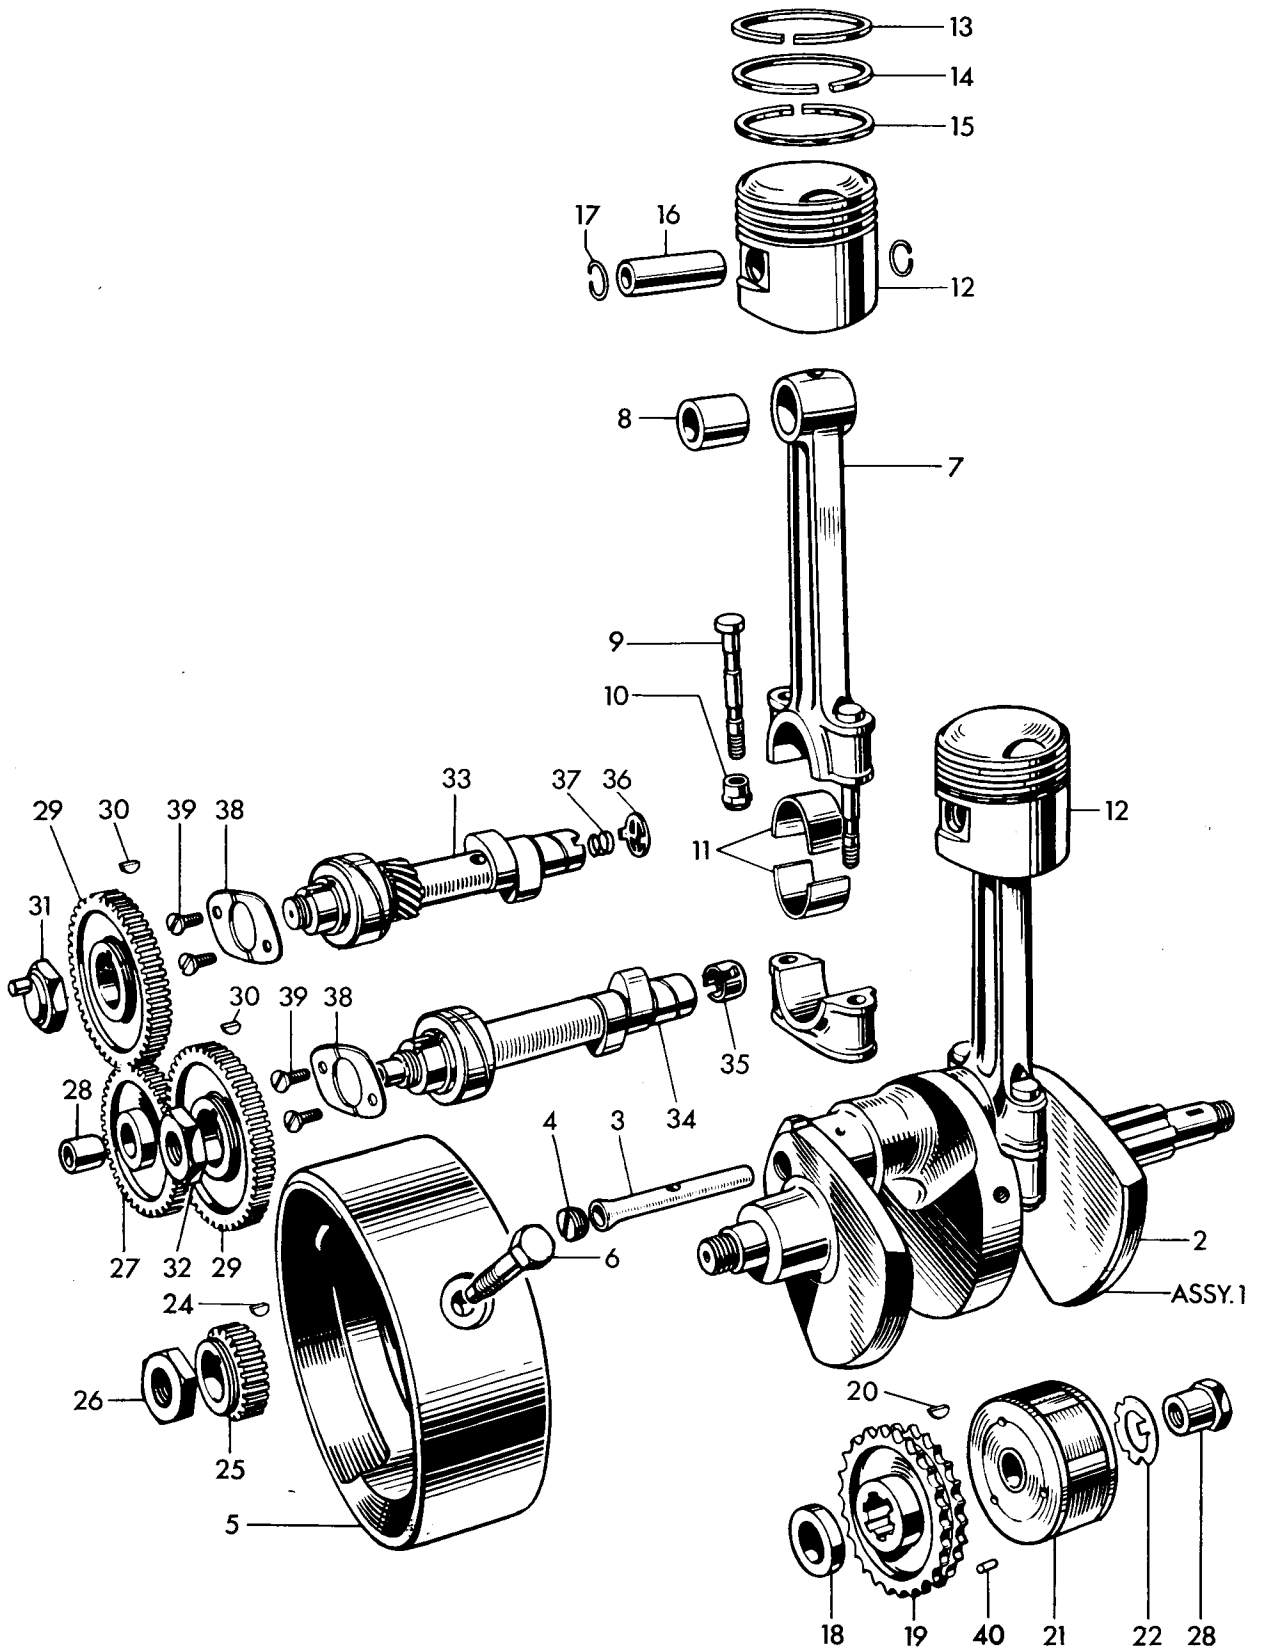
CRANKSHAFT AND CONNECTING RODS
